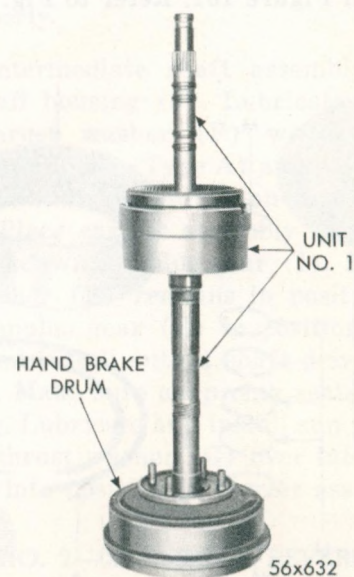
Using Propeller Shaft Flange and Brake Drum Assembly (As a Holding Fixture for Unit No. 1)
